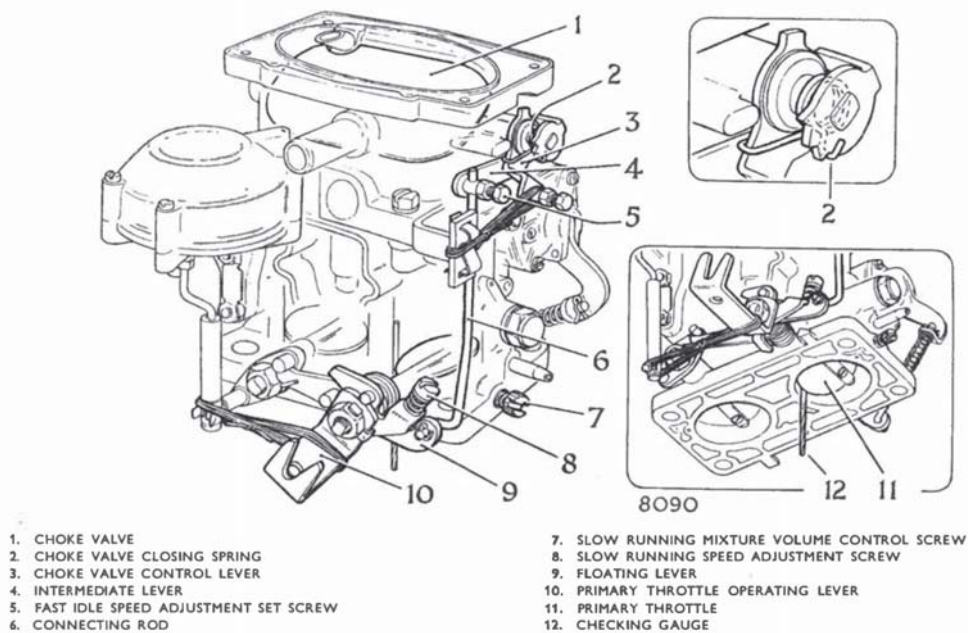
Primary throttle fast idle adjustment and strangler valve return spring adjustment
